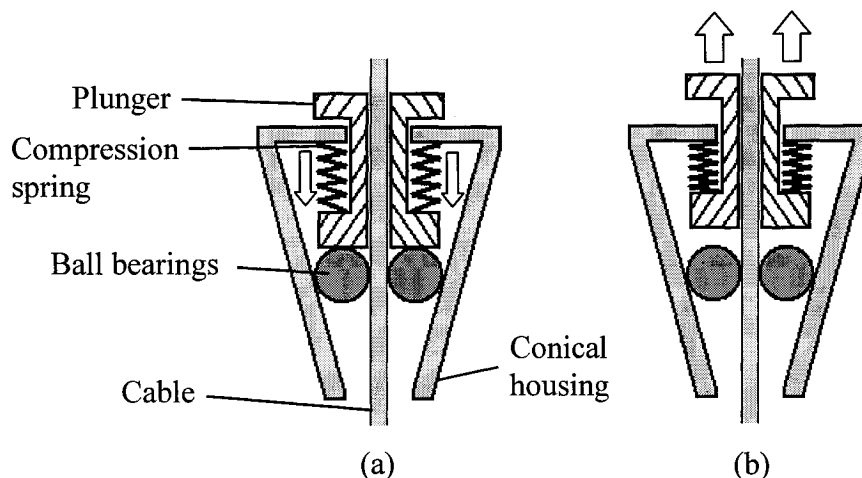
A cross sectional view of a typical conical cable clutch; (a) the spring-loaded plunger forces the ball bearings toward the narrow end of the conical housing, (b) lifting the plunger relieves the force on the ball bearings.
